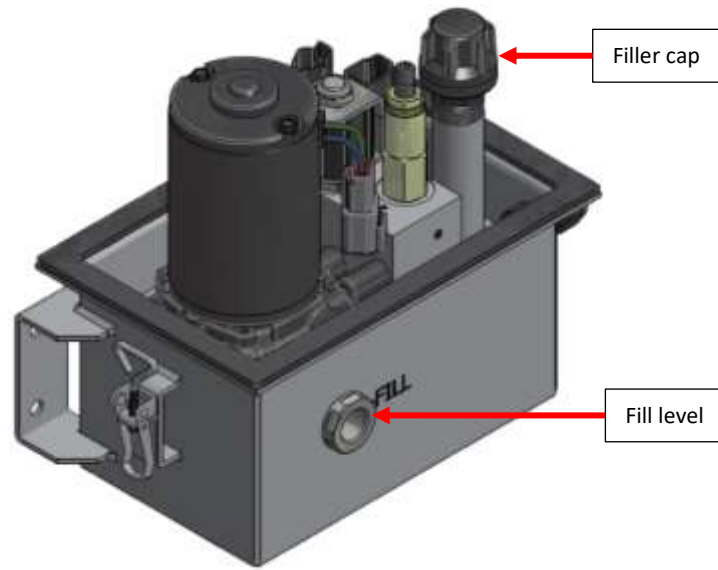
ABT™ Failsafe pump enclosure with lid removed.
